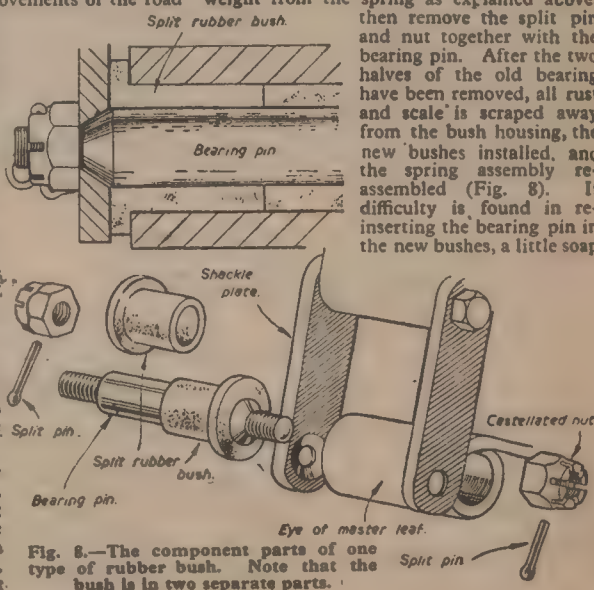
The component parts of one type of rubber bush. Note that the bush is in two separate parts.
